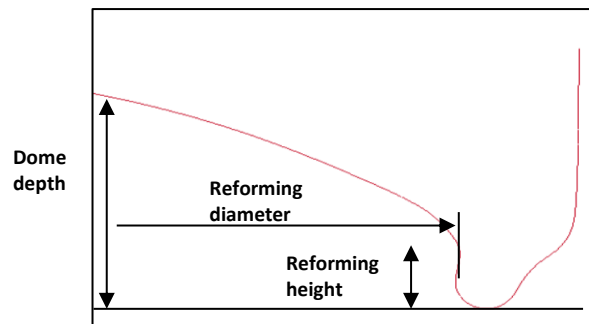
Schematic of the key geometrical dimensions after reforming: reforming diameter and reforming height.
